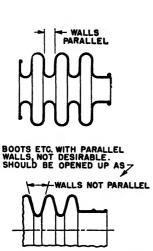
A rubber boot such as those used on hydraulic-control equipment should not be designed with sides parallel as in the upper drawing, but should have more of a "sine wave" shape, as in the lower drawing.
